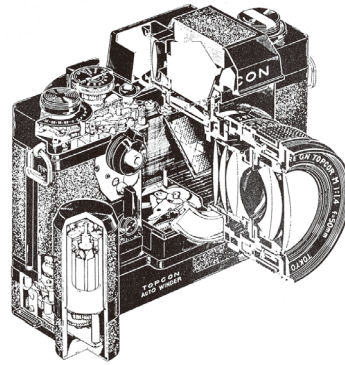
Topcon Super DM + Winder Structural Drawing¹¹⁾
